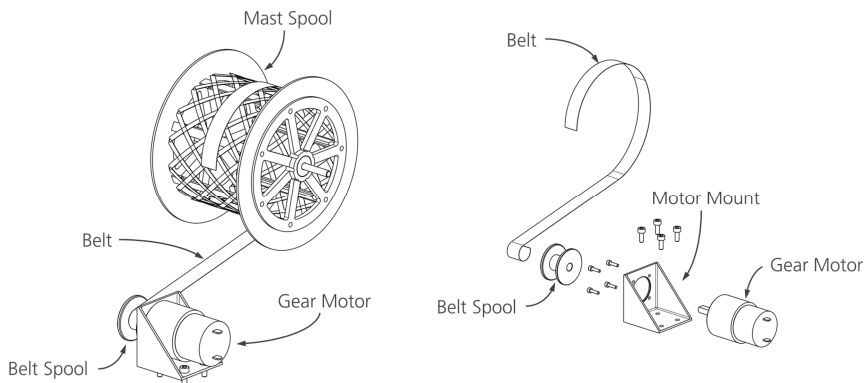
Drive Mechanism with attached belt and boom spool (left) and exploded state detailing its subcomponents (right).
